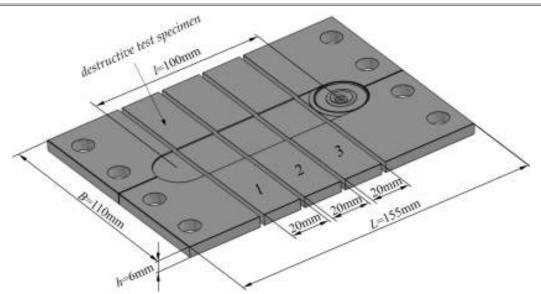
Schematic, position in welded plates and dimensions of destructive test specimens
